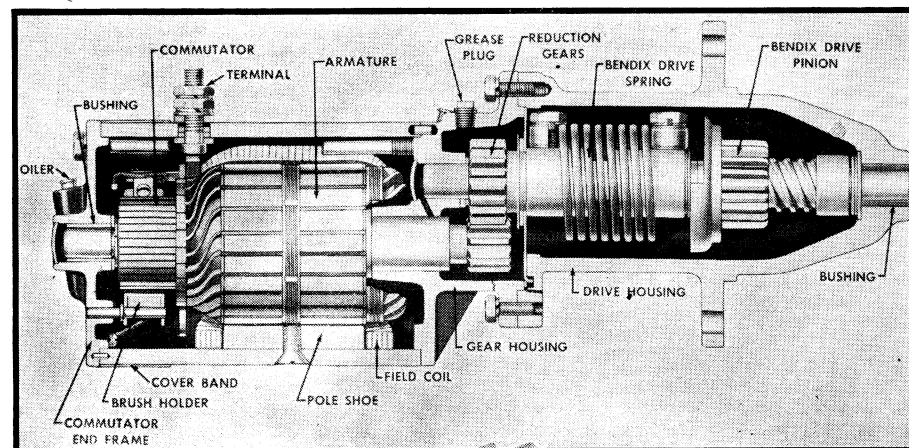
Standard Bendix Drive starter with gear reduction to give extra cranking torque
